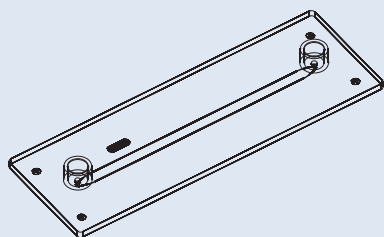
Schematic drawing of the one channel chip with Luer interface 0268 to be equipped with double-sided adhesive tape
